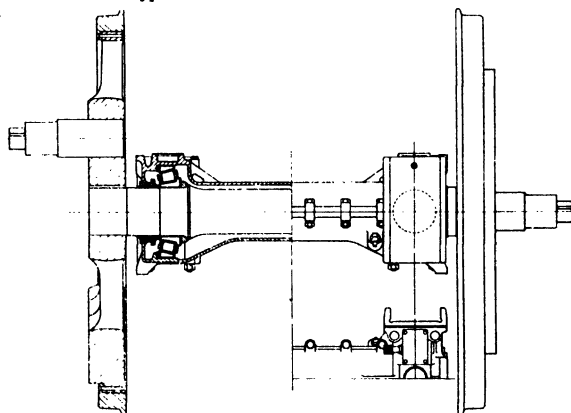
Split type Cannon Axlebox—Steam Locomotive Driving Axles.
